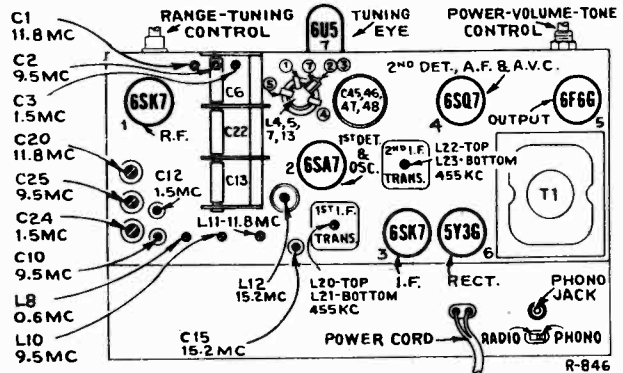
TUBE, TRIMMER AND PARTS LOCATION
